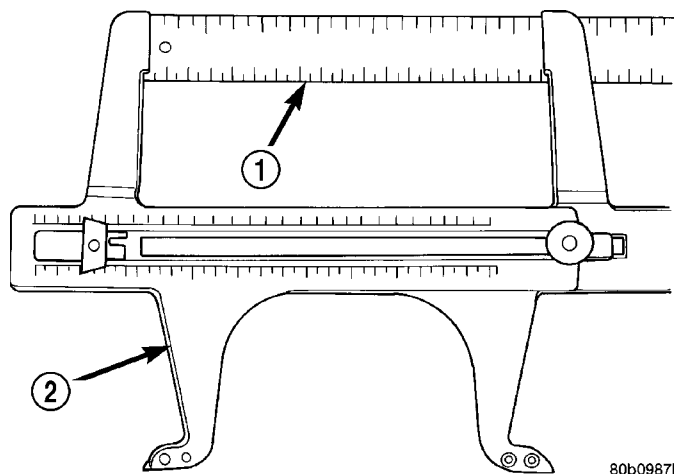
Setting Gauge To Park Brake Shoe Measurement
